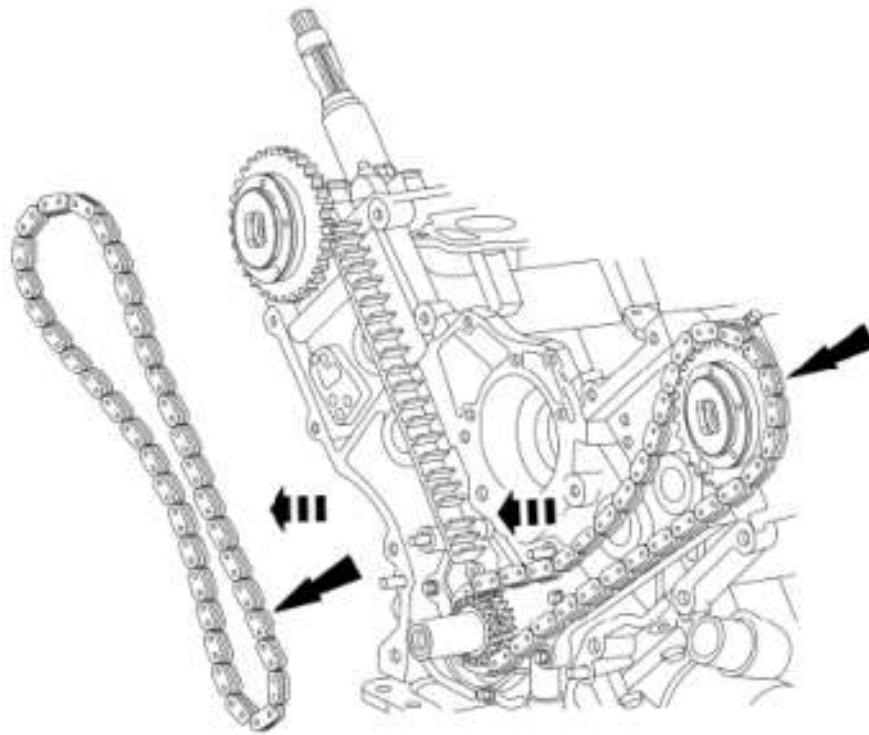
Removing Timing Chains And Crankshaft Sprocket
